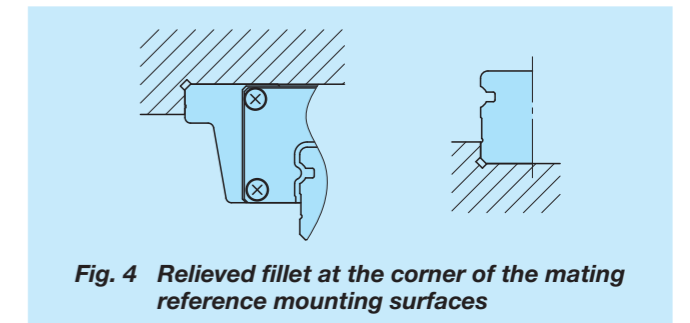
Relieved fillet at the corner of the mating reference mounting surfaces
